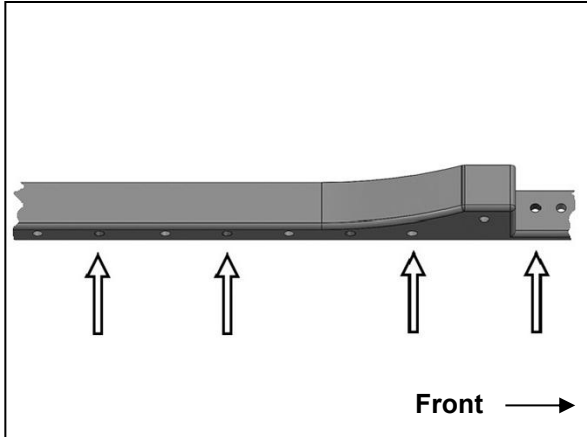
Insert Bolt Plate into factory hole. Tighten Retainer down against body panel
